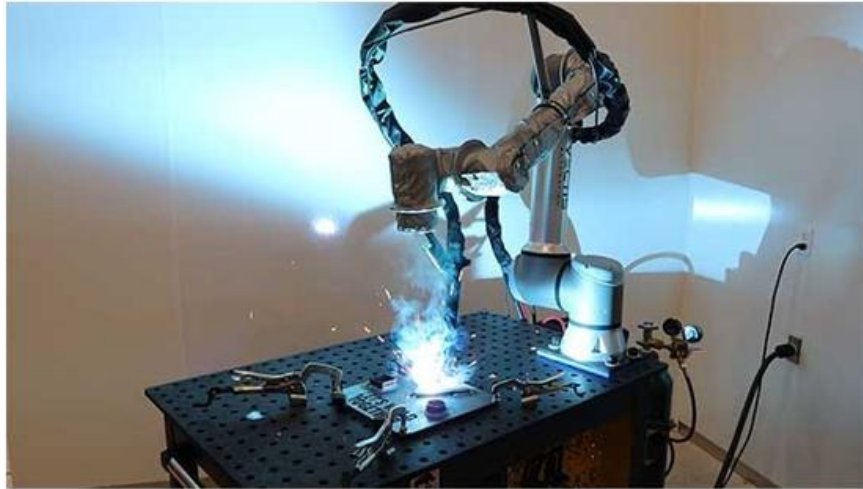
Universal Welding Robot (*Universal Robots, 2020*)
